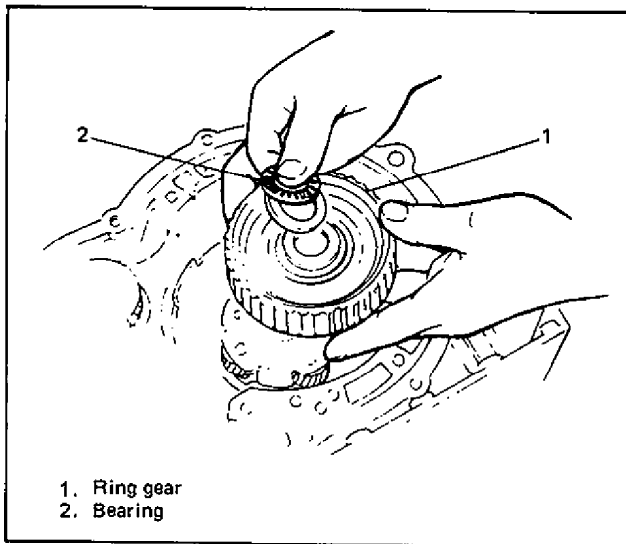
B-108 Removing Front Planetary Ring Gear & Bearing
